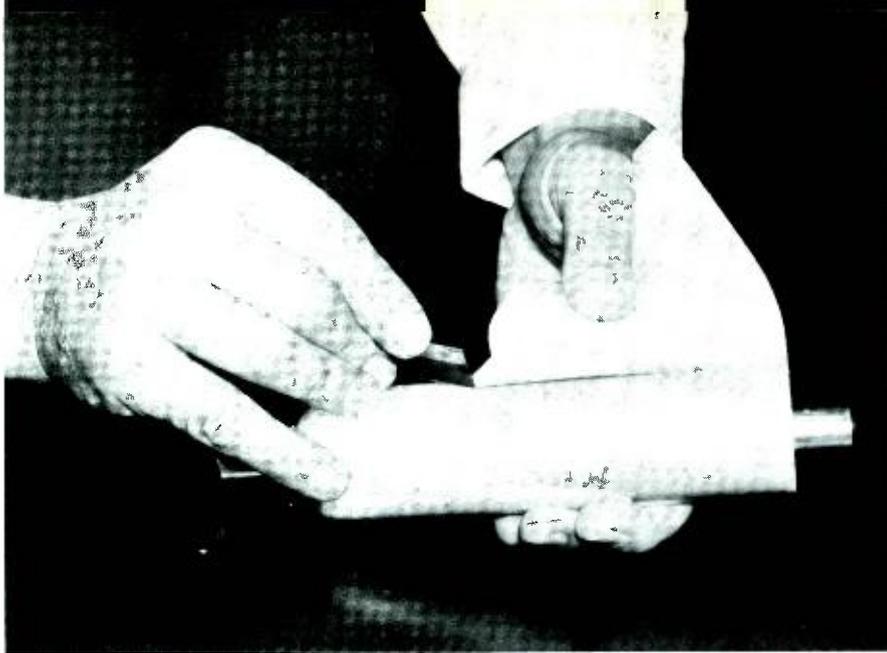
A conductive rubber roller is cut out of a polyethylene mold. The rubber material is a special conductive type formulated and fabricated in the DEP Chemistry Laboratory.
